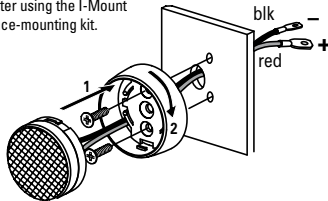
Mounting the tweeter using the I-Mount surface-mounting kit.
